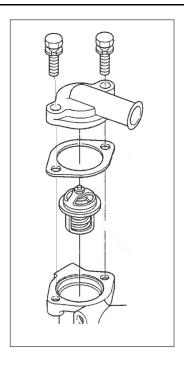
TYPICAL THERMOSTAT AND HOUSING
